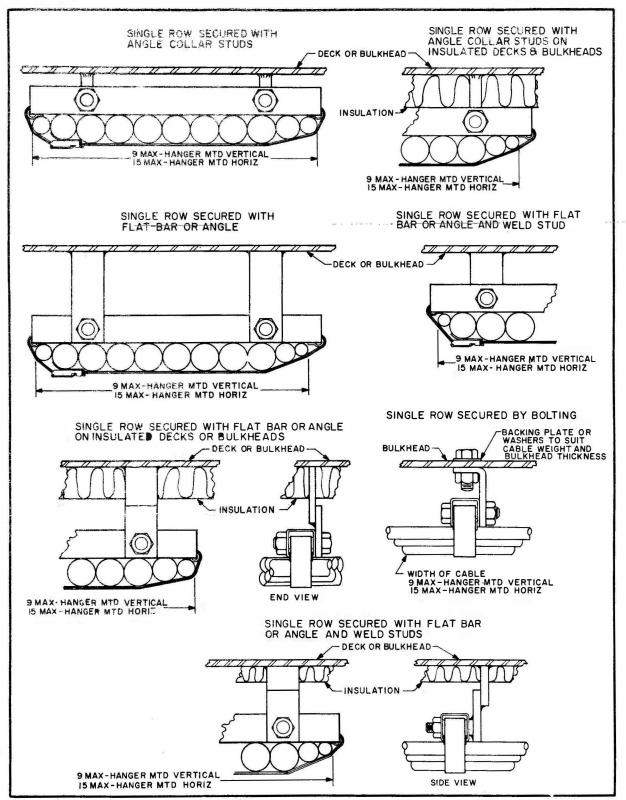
Single Rows of Cables on Aluminum or Steel Structures ORIGINAL 4-7-3
